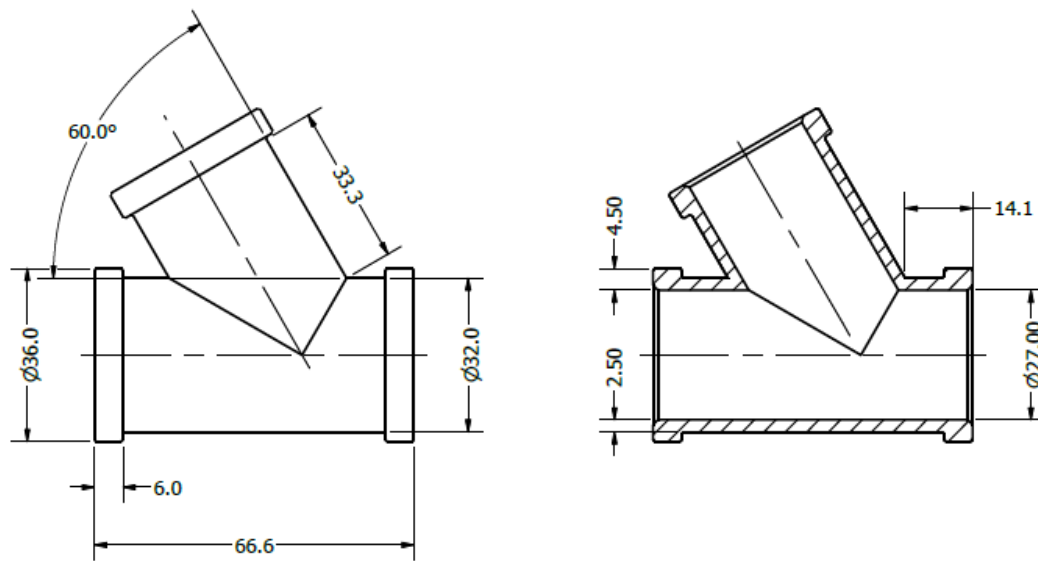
2D technical drawing of Y-shaped pipe (right), cross section (left).
